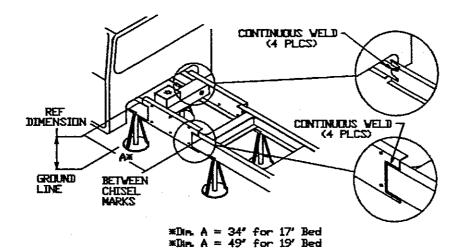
WELDING REAR SECTION TO CAB SECTION
